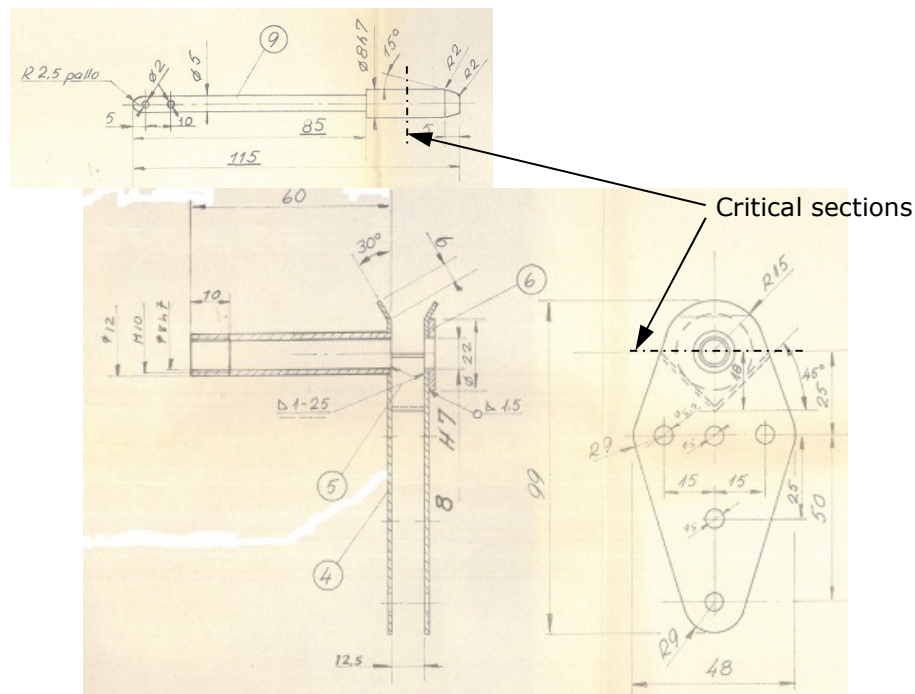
Fin forward fitting bracket and pin for the attachment of the tailplane forward fitting, ref. drawing 2-20D-52-100-4,-5.
